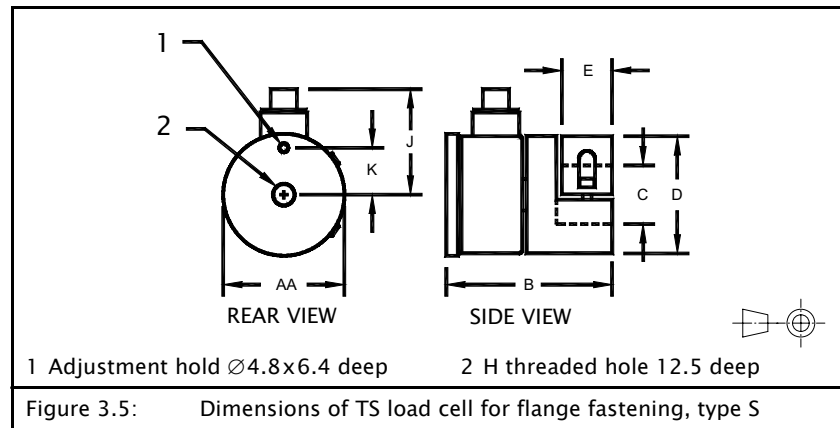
Dimensions of TS load cell for flange fastening, type S
